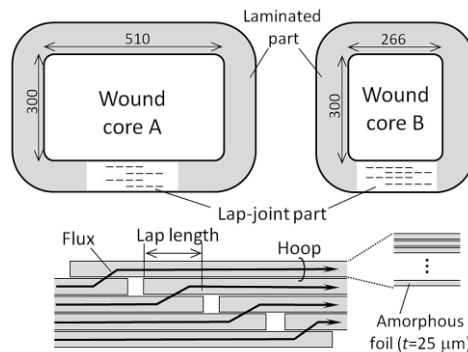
Dimensions of tested cores and schematic cross section of lap joint part (Unit: mm)
